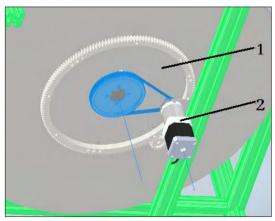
The drivetrain of the collector: 1 – stepper motor and 2 – toothed belt drive.
